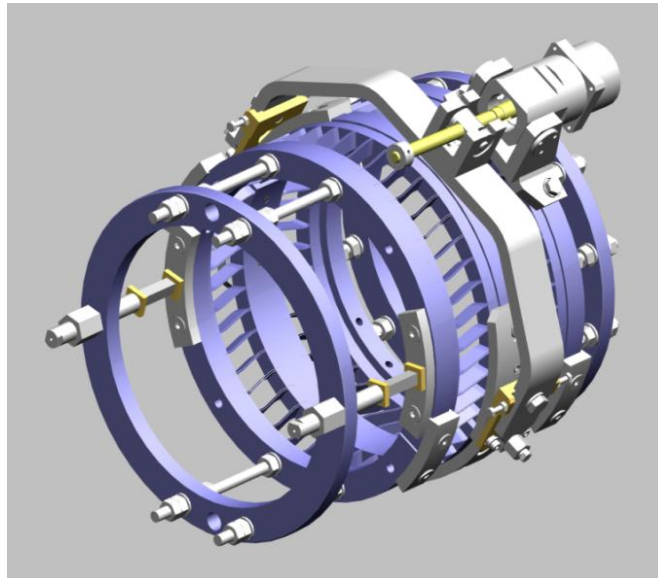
the Blade Tuner design after piezo actuators integration
